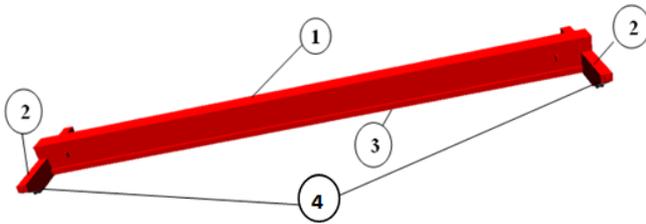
Model of main girder and side girders: 1-Main girder; 2-Side girders; 3-Side extensions for the laying telpher; 4-Crane wheels;
